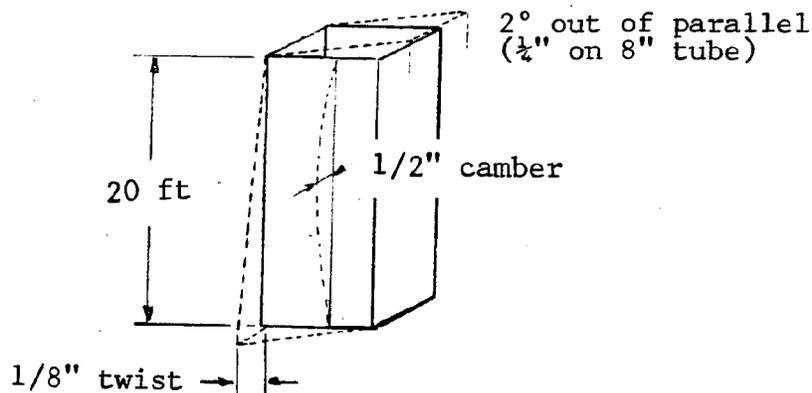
Allowable Tolerances Steel Tube
